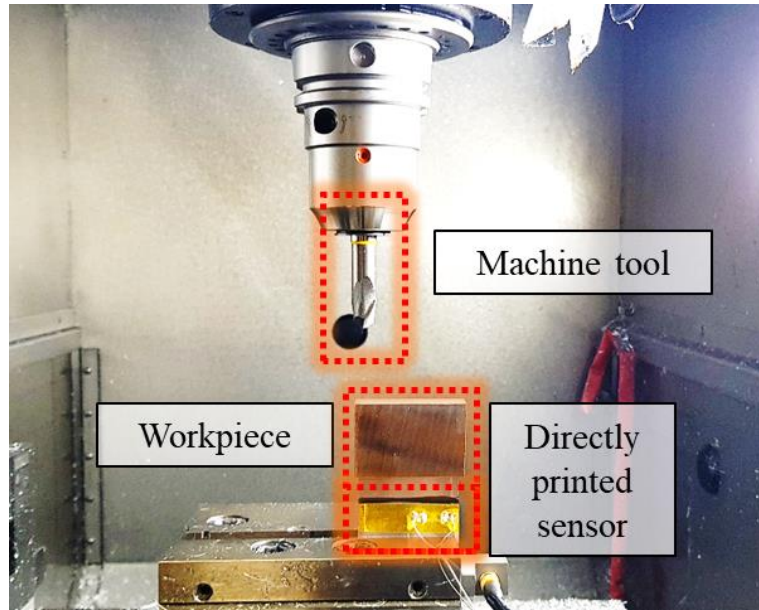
The photograph of experimental setup of turbine blade milling process monitoring using printed sensor
